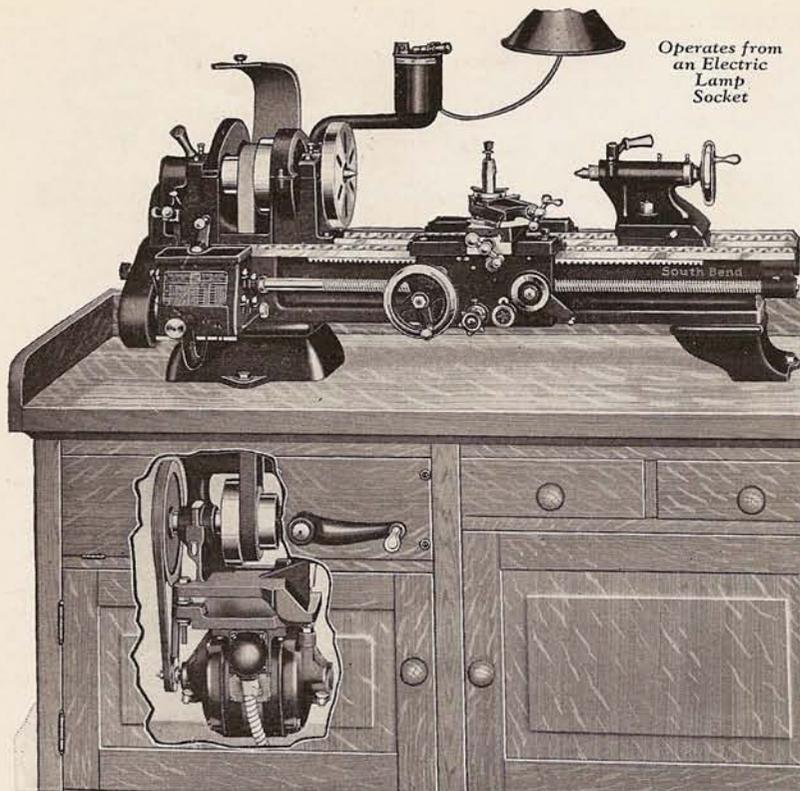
South Bend Underneath Belt Motor Driven Bench Lathe with Section of Bench Front Cut Away to Show Drive Mechanism. Bench used is illustrated and described on page 56.
